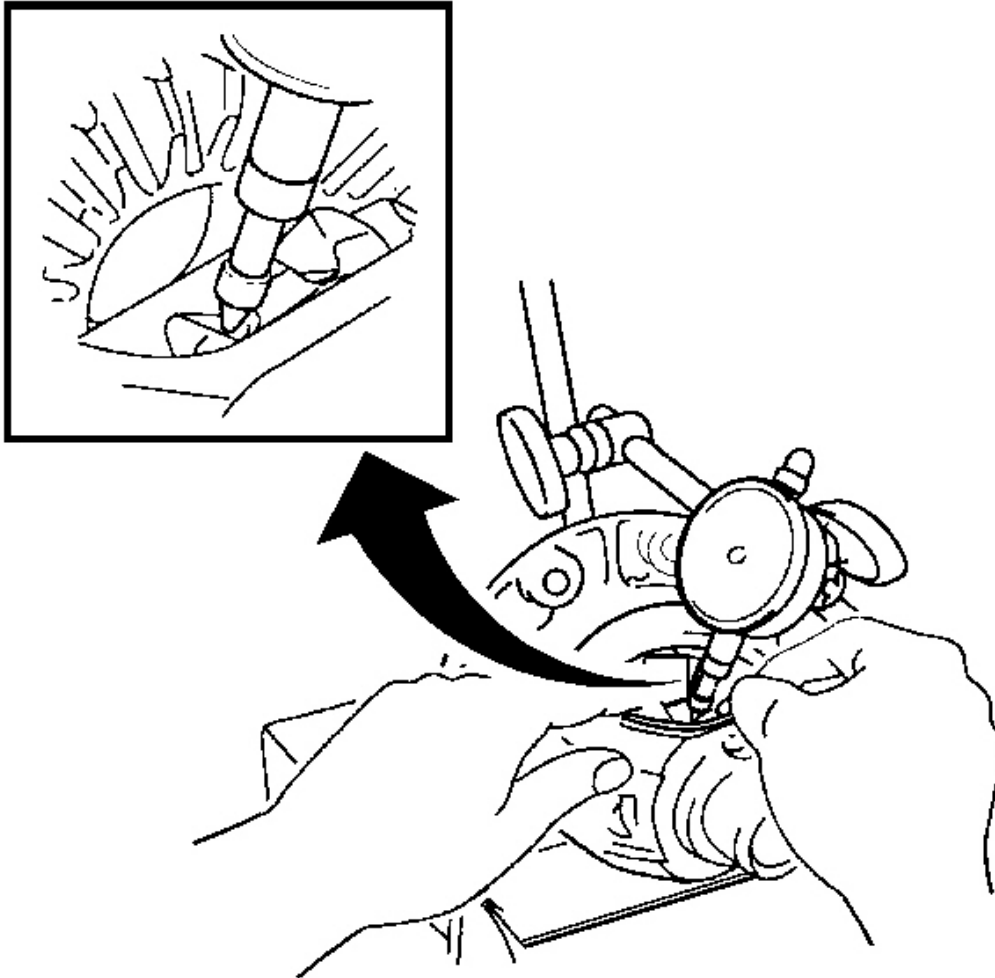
Measuring Side Gear Backlash While Holding 1 Pinion Gear Toward The Case
